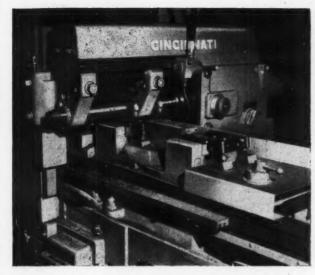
Cincinnati machine set up for profile milling shot gun frames by the pendulum method
